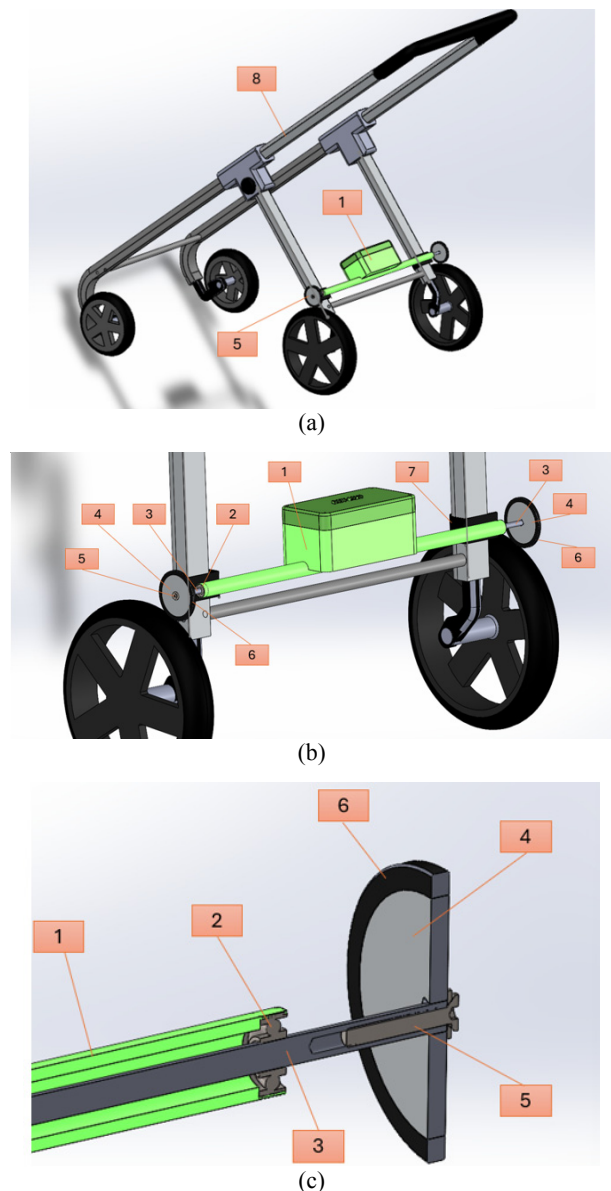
BABY-CALM device: (a) installation on the frame of a baby stroller; (b) breakdown of different parts of the device; (c) detail of the shaft, wheel and screw assembly. (1) Central casing, (2) Bearing, (3) Shaft, (4) Wheel, (5) Bolt, (6) Tire, (7) Subjection, (8) Carriage
